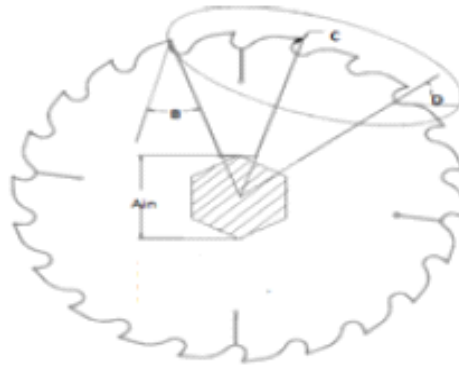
Typical nominal parameters of a typical circular cut-off cutting blade [8]
